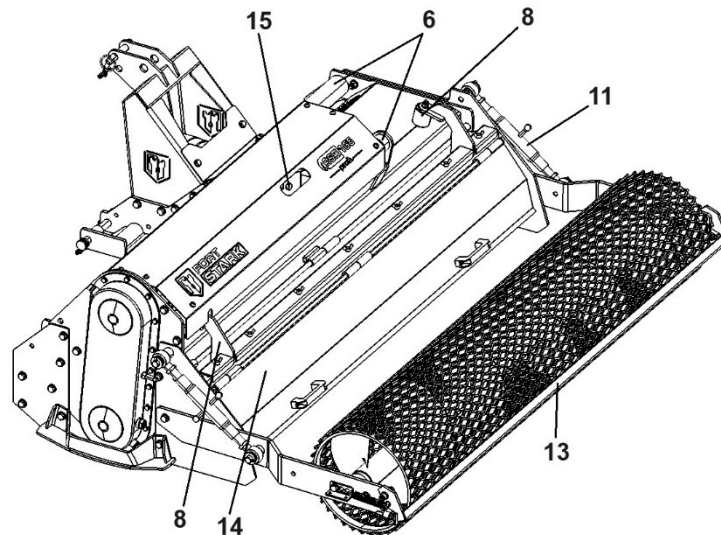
Stone burier - general construction: 13 – scraper, 14 – rear guard, 15 – bevel gearbox
